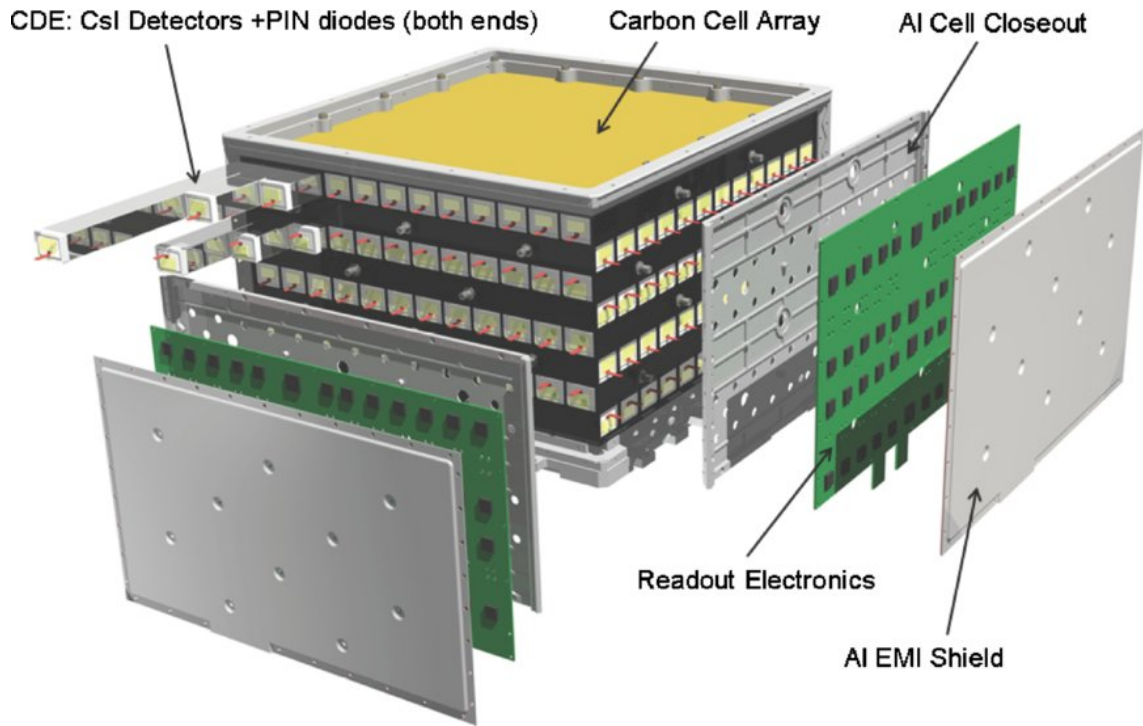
Exploded view of the Calorimeter, showing alternating orientations of the CsI(Tl) crystal elements, each with a photodiode attached to both ends [5].
